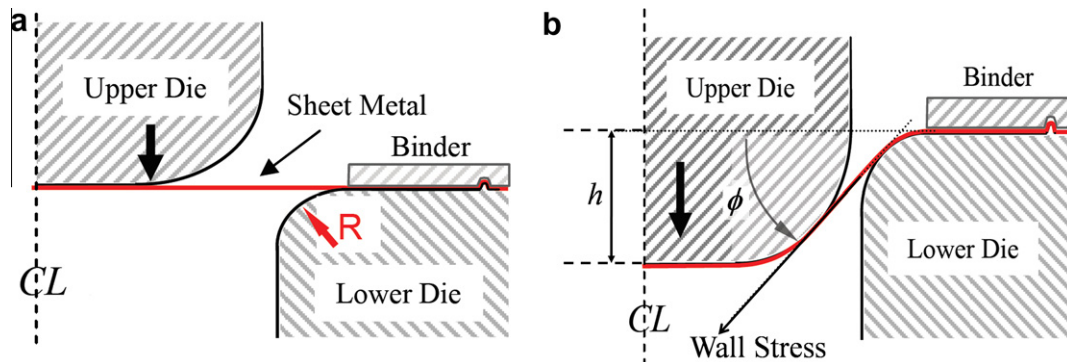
Typical first stage of a stamping process: (a) binder closure; (b) die closure (Shih et al., 2009).
